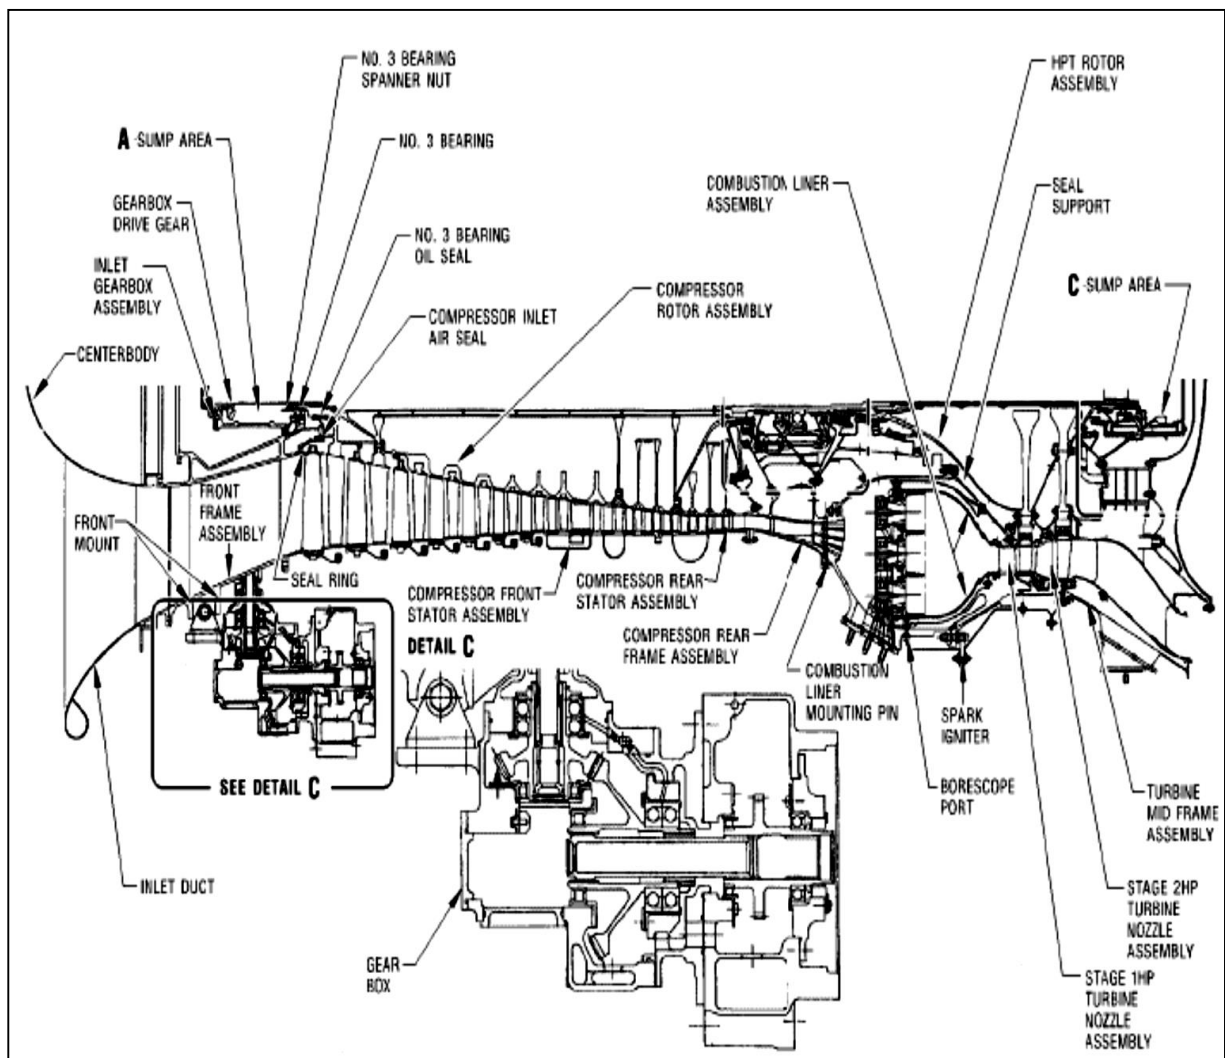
LM2500 Gas Generator assembly – Cross section [30].
